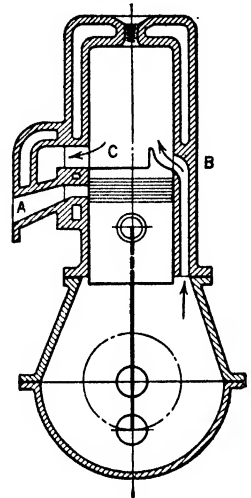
Elementary two-stroke cycle gas engine with crankcase compression.
